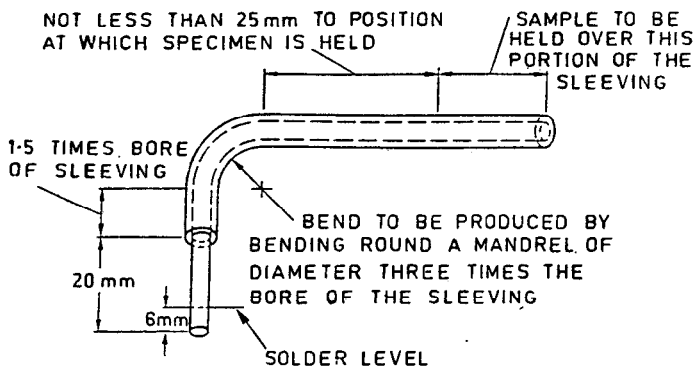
SPECIMEN FOR TEST FOR RESISTANCE TO SOLDERING HEAT
